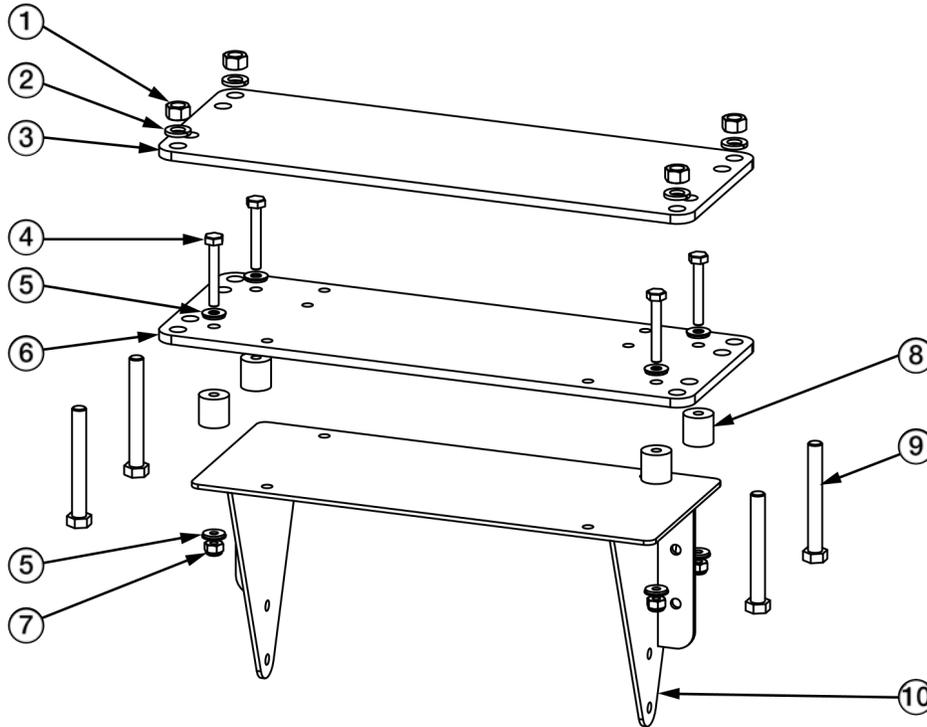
Mount Assembly Parts Illustration (PN 98413)
